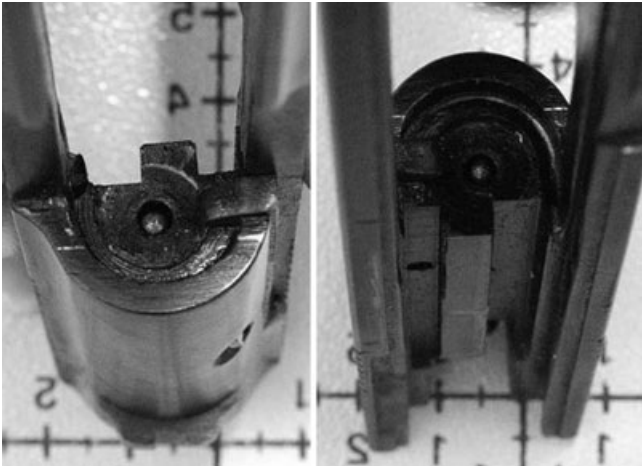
Photographs showing the breechblock of a partially dismantled 9-mm handmade gun.
